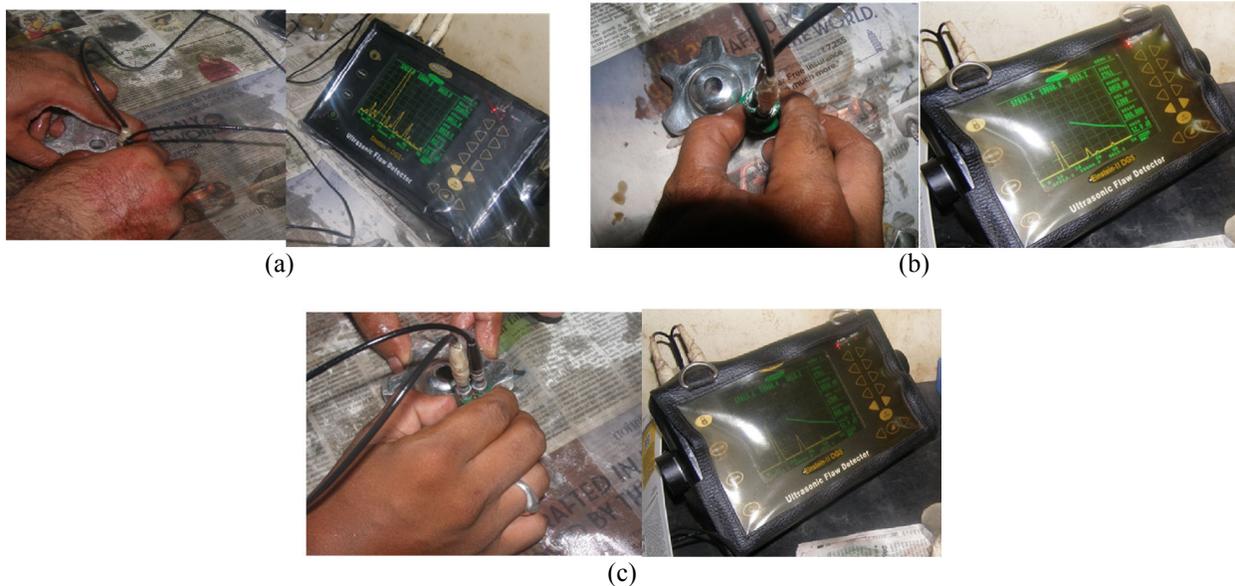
ultrasonic Inspection testing of Gear wheel aluminum alloy A356 castings poured in (a) 100% Sand Mould (b) 100% BF Slag Mould (c) Mixture of 50% GBF Slag+50% Sand mould.
